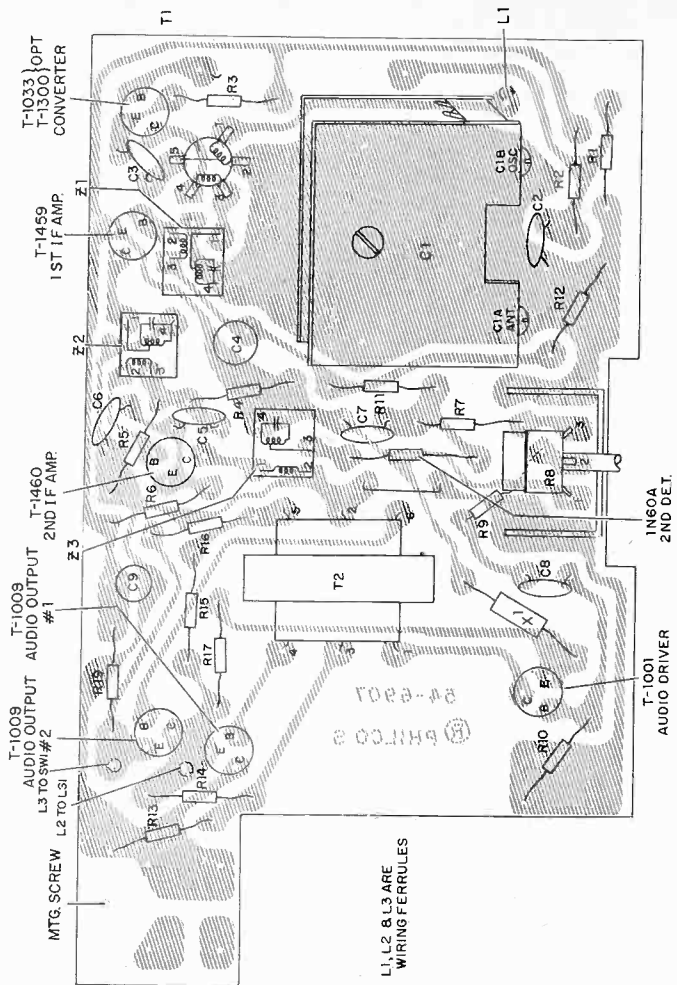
Component Panel Top View — Showing Parts Location and Tuning Adjustments
